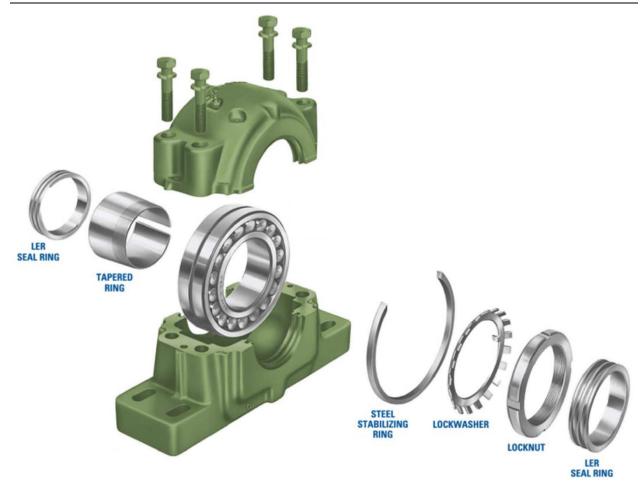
Roller Bearing (Courtesy of The Timken Company)
